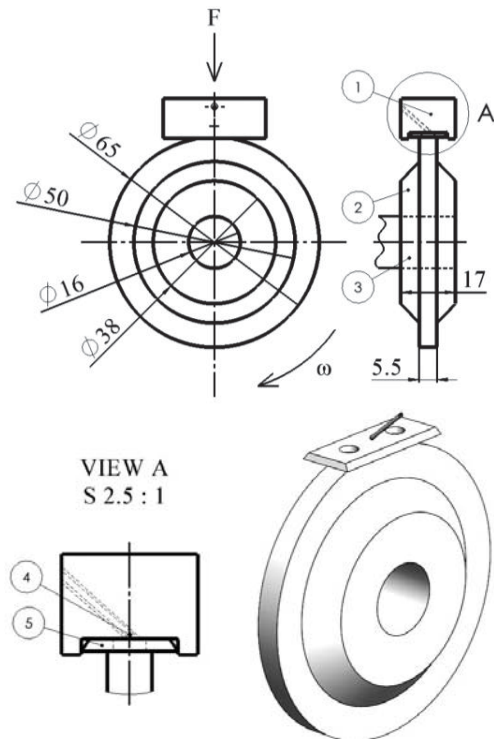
Test scheme: 1-metal holder; 2-wheel of the material under study; 3-shaft; 4-K-type thermocouple (at a distance of ≈1.5 mm from the contact center); 5-cemented carbide plate
